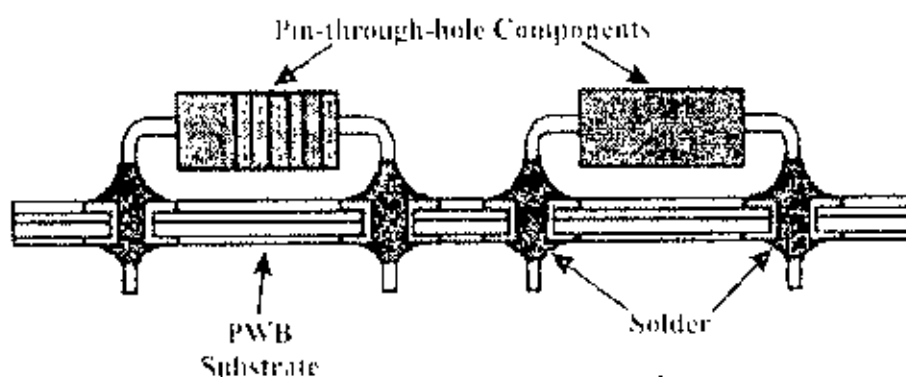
Cross-section of a pin-through-hole connection on a printed wiring board.
